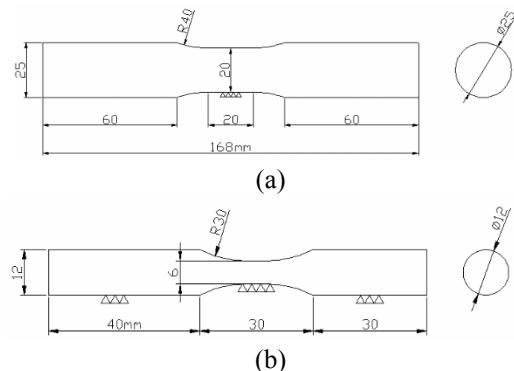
Geometries of specimen machined from the molded cast iron: (a) tensile test specimen, (b) fatigue test specimen for rotary bending fatigue testing
